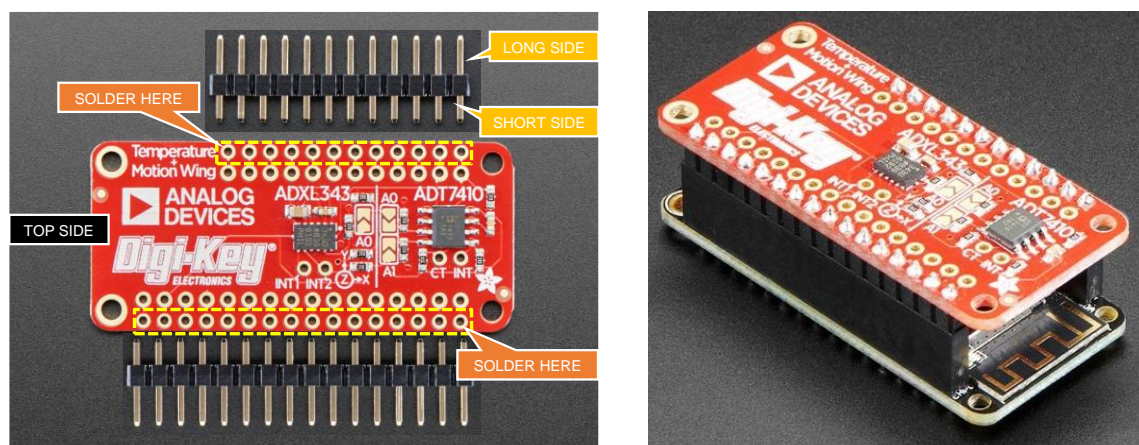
(a) Soldering Headers on Sensor Featherwing (b) ESP32 and Sensor Featherwing Assembly
